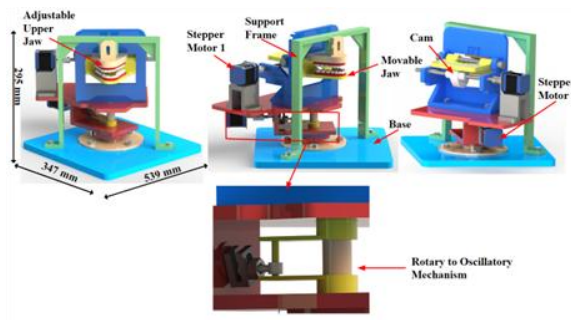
Basic Static CAD model of dual motor Masticatory Robot
